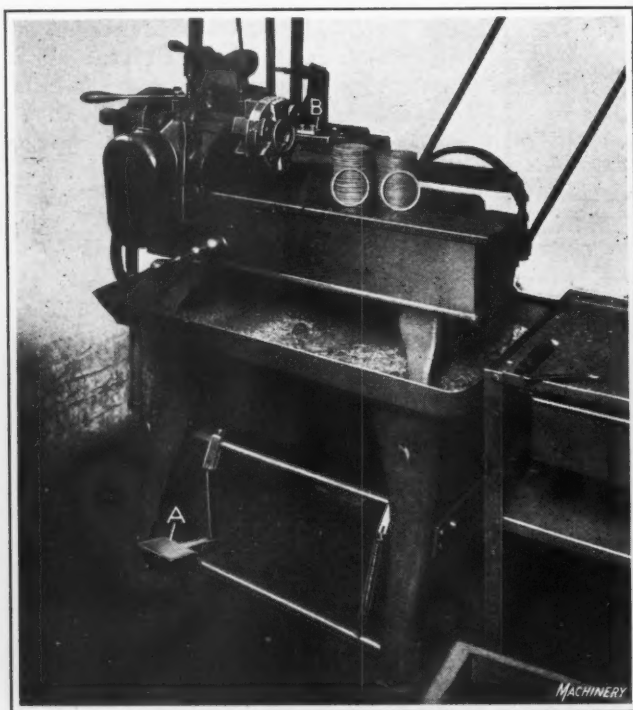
Short-bed Lathe equipped with Pedal-operated Air Chuck and Cam-actuated Facing Attachment for machining the Outer Ring
